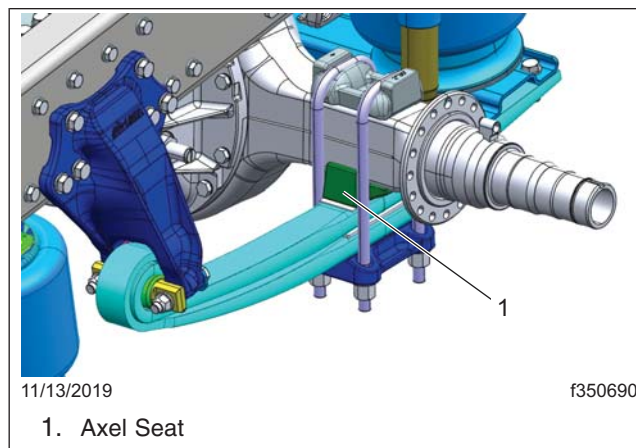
, Airliner Suspension Rear Rear Drive Axle
